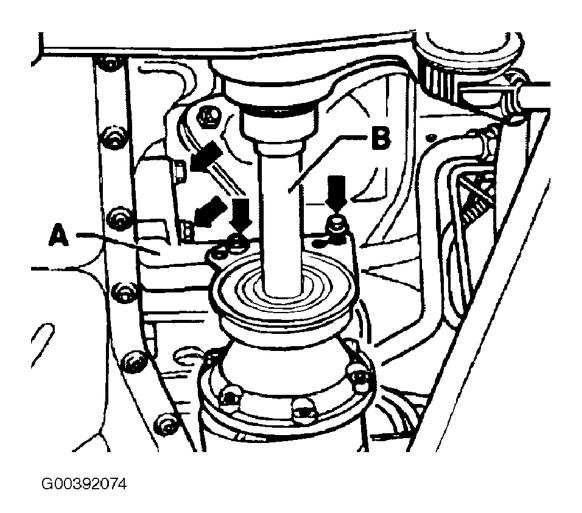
Pulling Off Drive Flange (Right Side - Up To December, 1995) Courtesy of VOLKSWAGEN UNITED STATES, INC.
